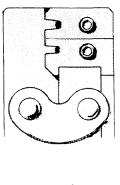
Molex Terminal and Tools (Sheet 1 of 3)
